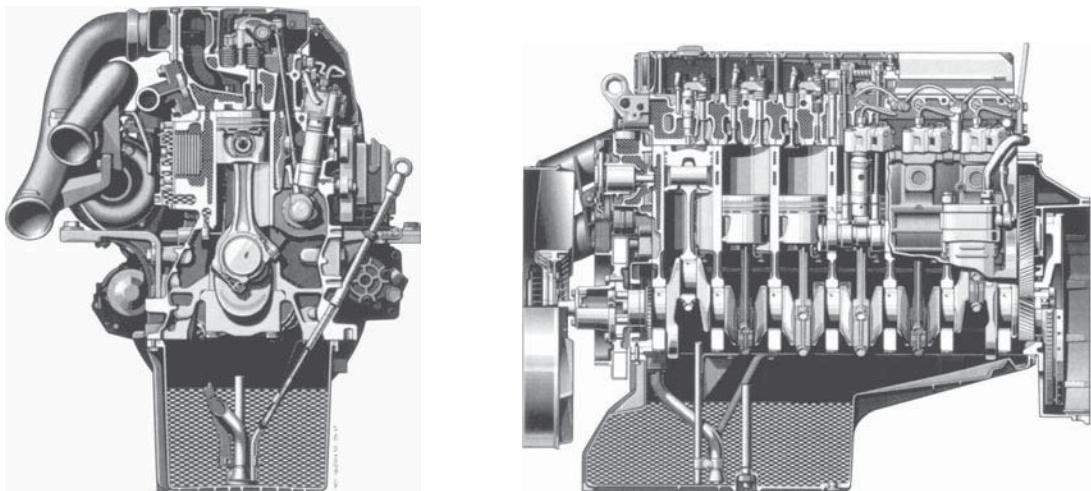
Sectional view of a MB-906: note the location of the engine housing components. (Courtesy of Mercedes Benz)
